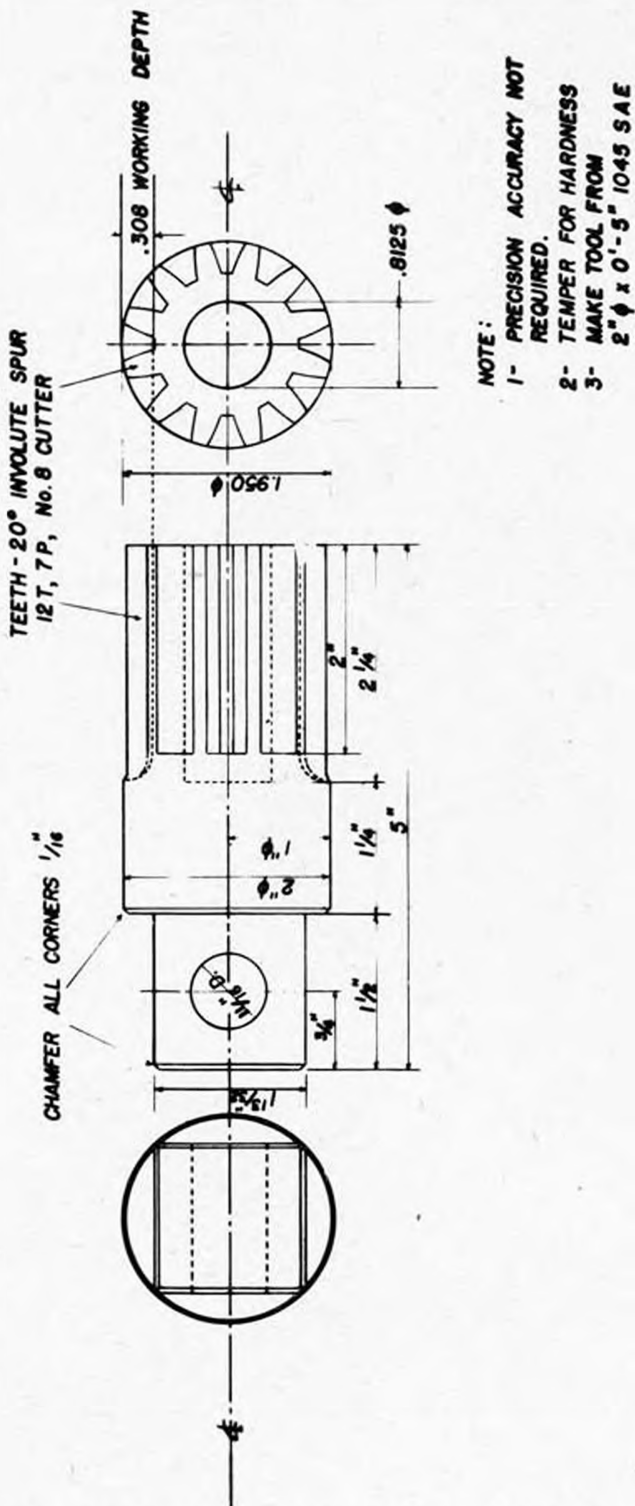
Special Tool For Bayonet Type Locking Ring Used With Type 93 Model 1 Modification 2 And Type 93 Model 3 Torpedoes
